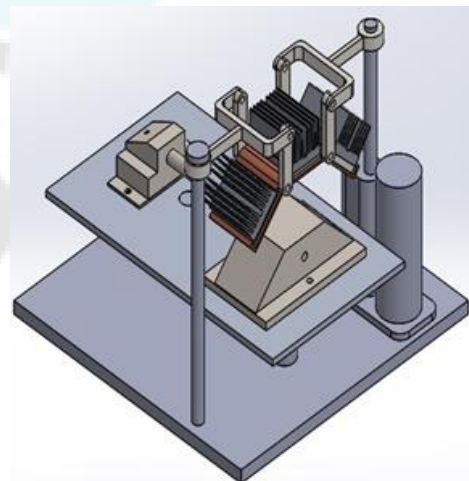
CAD Model of Thermokinetic desorpter Assembly with Condenser
